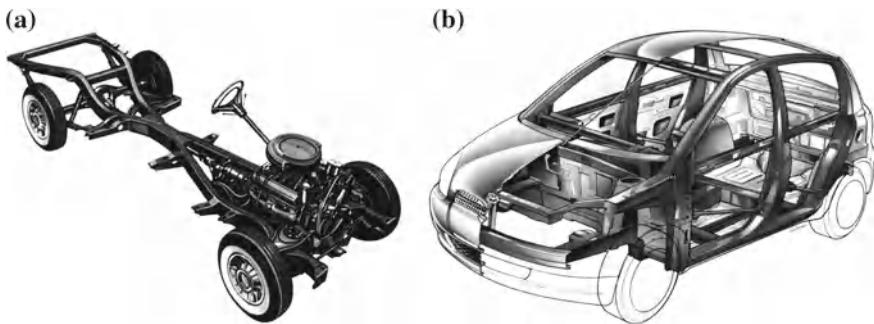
The two more relevant technologies in car body structure construction; a the bearing chassis; b the unibody
